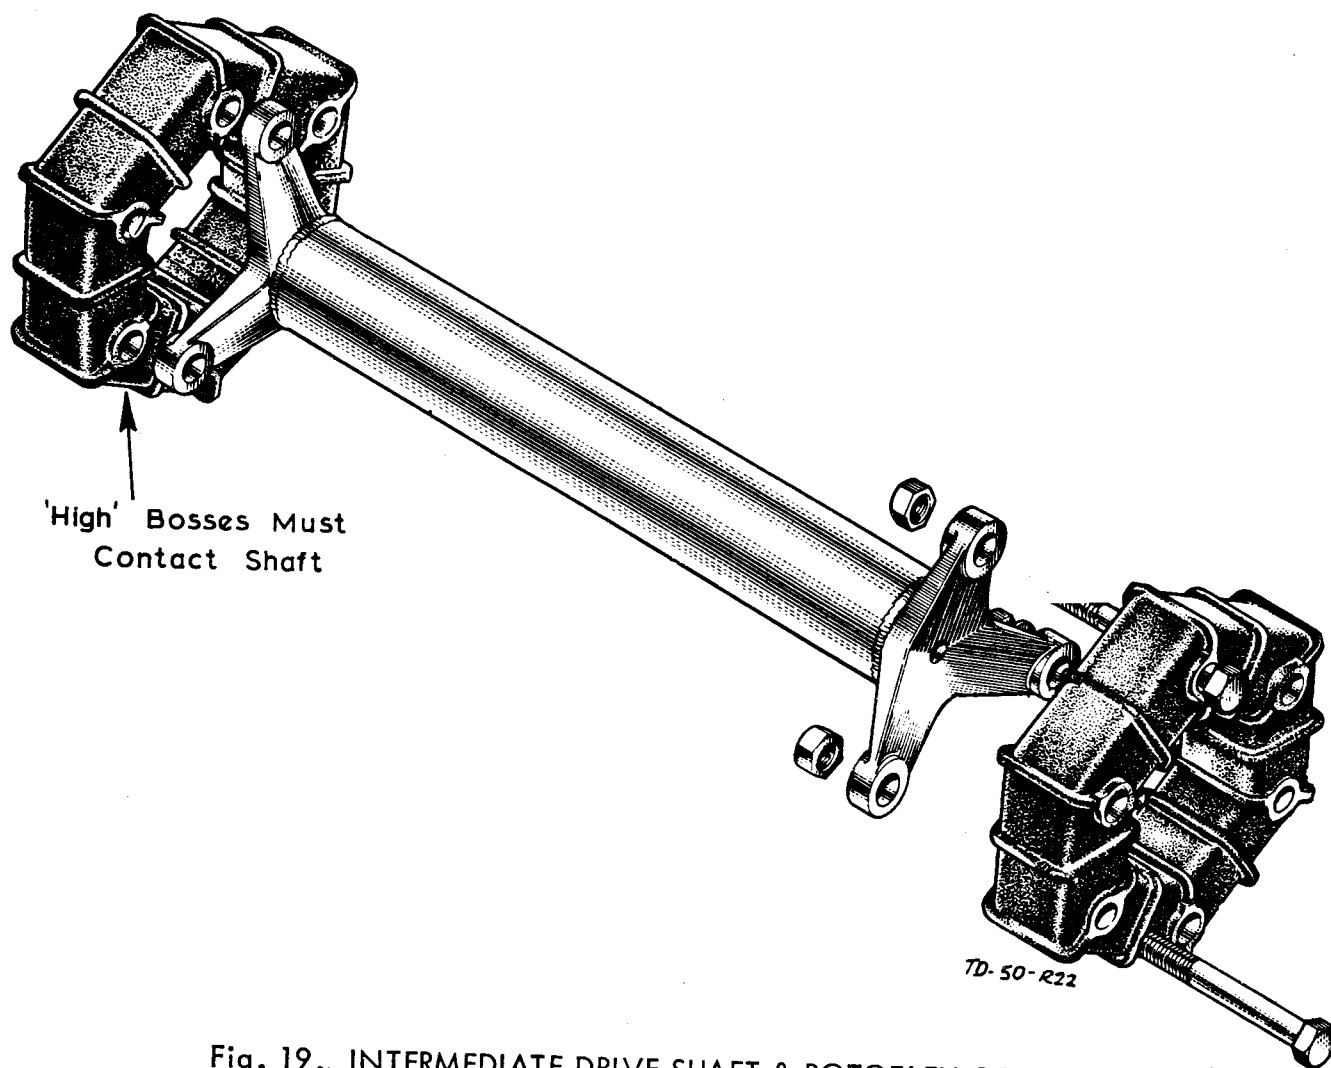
INTERMEDIATE DRIVE SHAFT & ROTOFLEX COUPLING
